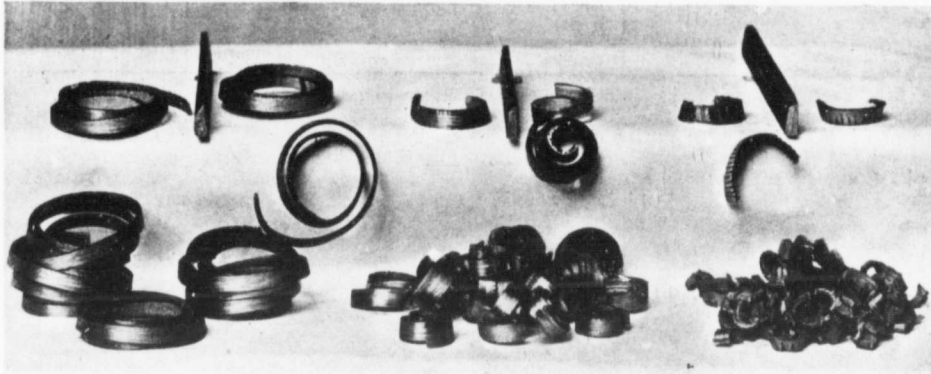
Samples of Chips and Cutters: Cutting Angles from Left to Right 45 Deg., 60 Deg. and 75 Deg. These Chips were Produced in an Engine Lathe with Holder Shown in Fig. 12. The Chips were Confined Edgewise Between the Body of Work and the End of the Holder. The Breakage of Chips Taken by the 45 Deg. Tool were due to Chips Getting Caught Between the Work and Tool Holder, Usually due to the Irregular Winding of the Chip. The Chips Produced by the 60 Deg. Tool Wound up till the Circle was Greater than the Chip Could Take Without Breakage.
